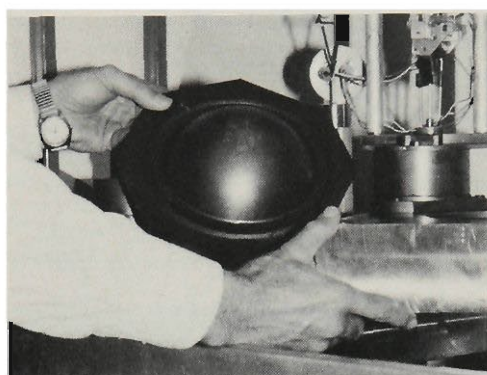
a bulged specimen of hot-rolled steel being removed from the bulging chamber
